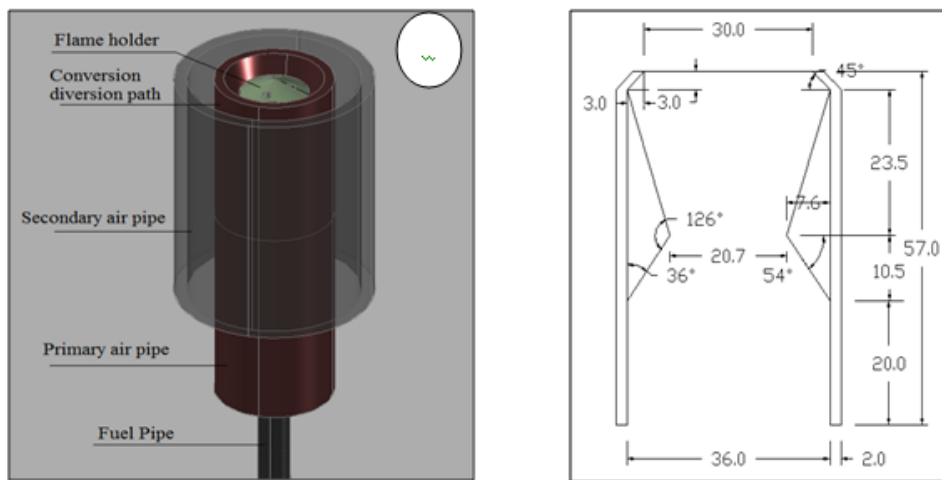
The burner parts construction (a) Burner parts, (b) conversion diversion path (dimensions in mm).
